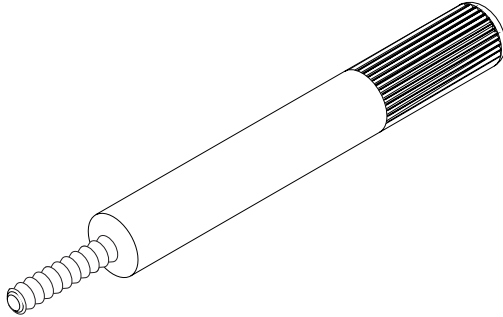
CPUset Module Locking and Motherboard Ejection Tool
